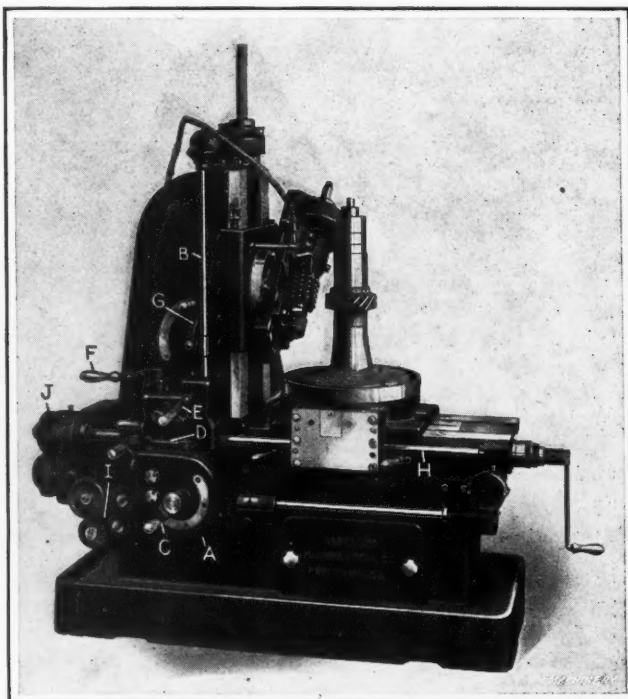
Left Side of Gear-hobber, showing Gear-box controlling Feed of Cutter-slide
